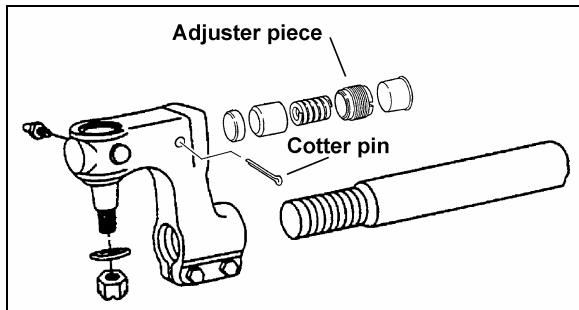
TIE ROD END PLAY ADJUSTMENT 10029
